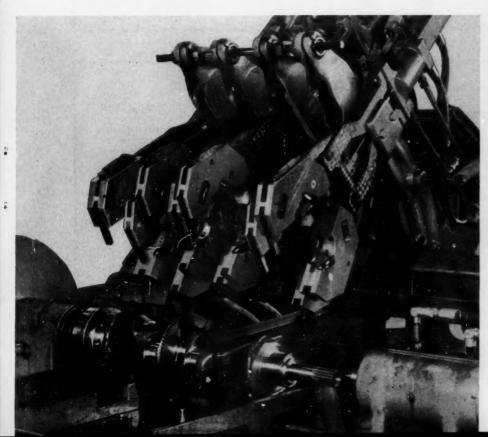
Crankshafts and similar parts are fillet rolled by multiple-fillet rolling equipment on a production basis, left. Closeup of open shoe on one of the rolling heads is shown above.
